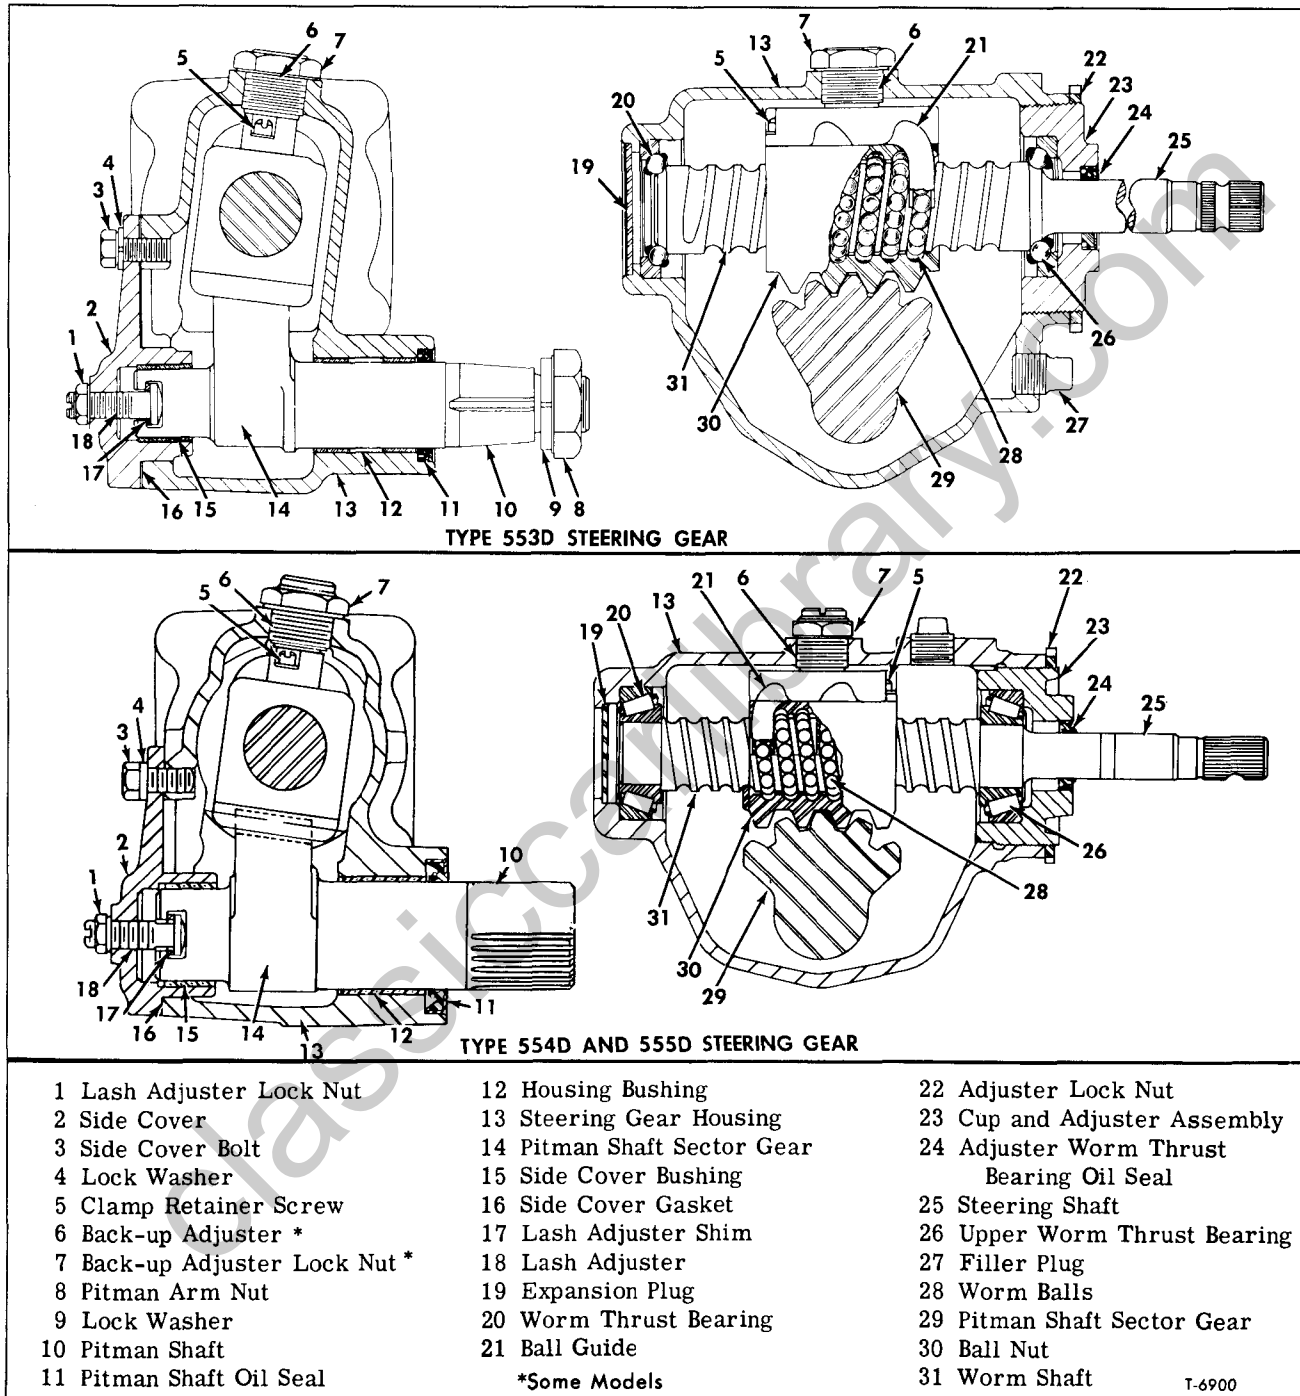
Type 553-D and 555-D Steering Gear (Typical)
